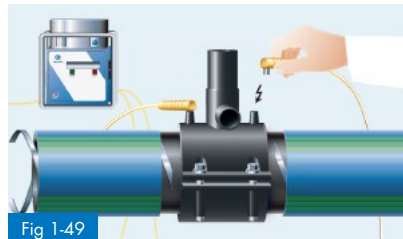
Welding process acc. to DVS 2207 Part 1
